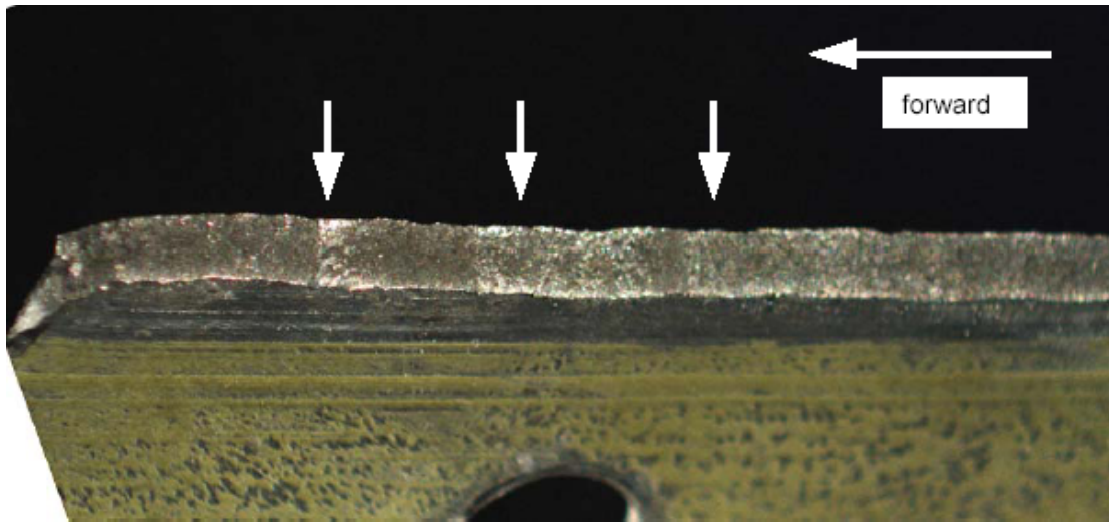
Photograph showing the incremental crack growth indications (arrows) on the fracture segment near Hole 7, which is between the two main fatigue cracking systems at Holes 4 and 5 and Holes 10 through 25.
